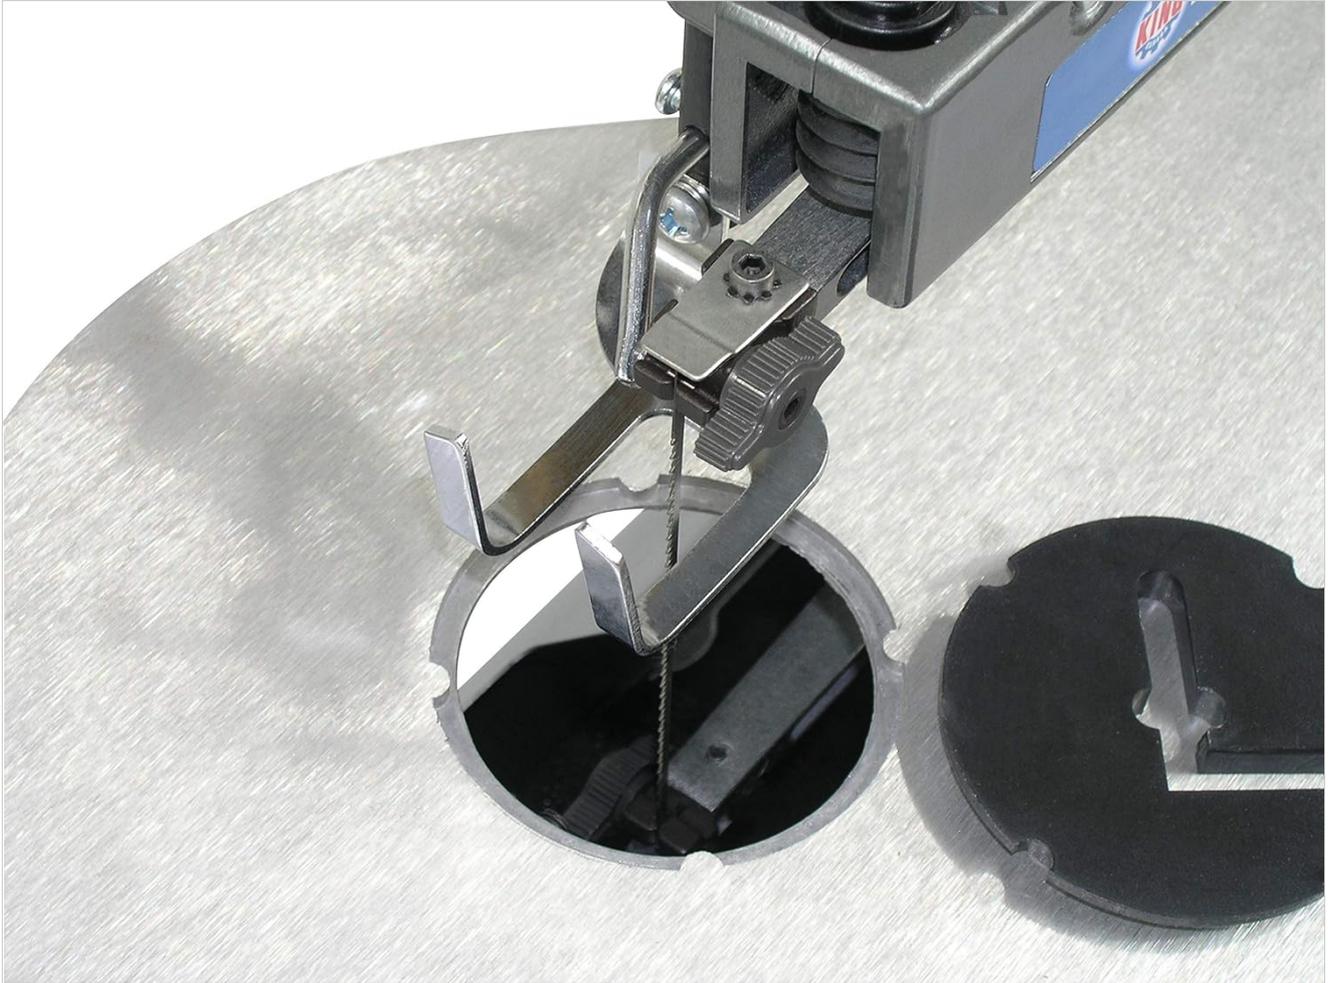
Close-up of the blade area, showing the tool-free blade change system and dust blower nozzle.
